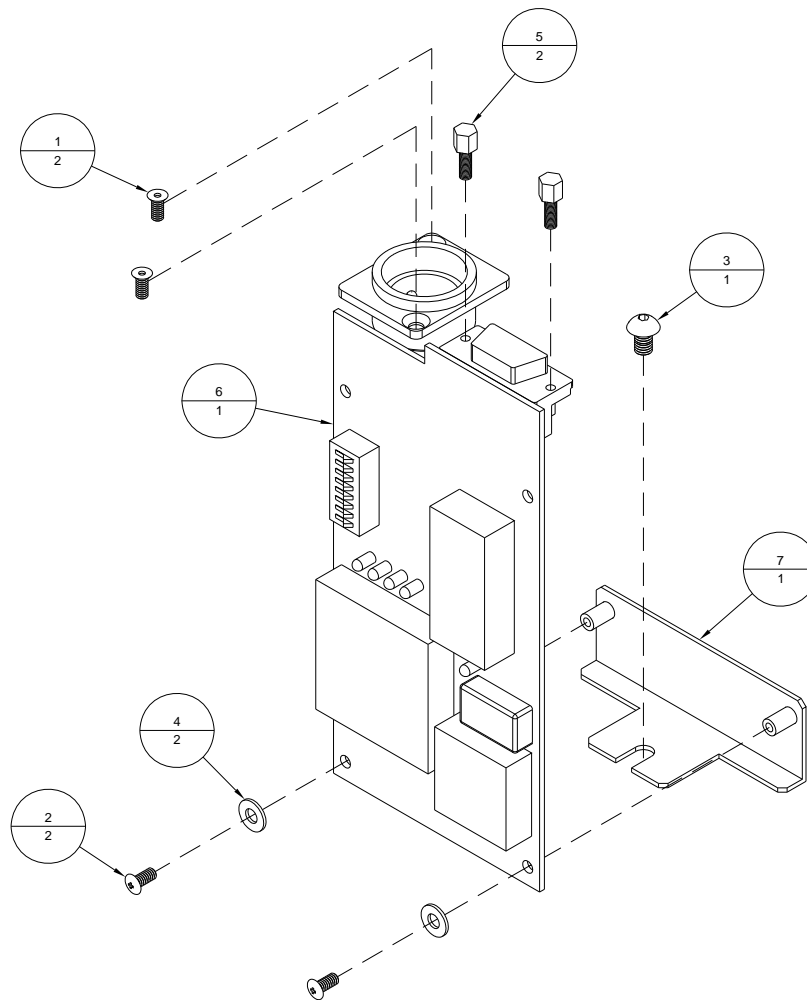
Apollo Interface Board Assembly (9103649A)
